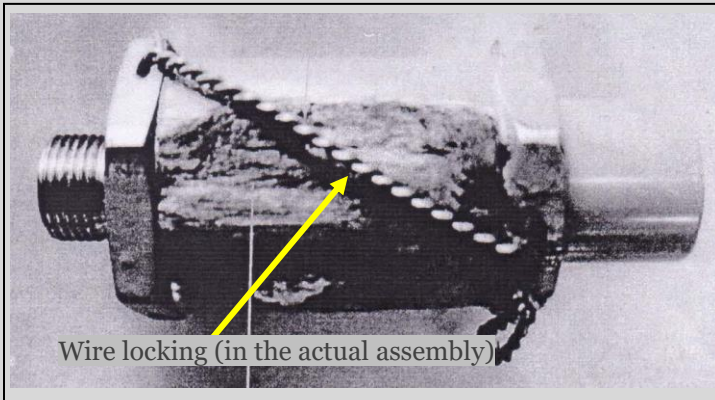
Wire-locking in the assembly had rubbed against the *end fitting* in the affected area. Because of this, the protective coating on the part got removed in localized area causing corrosion.
